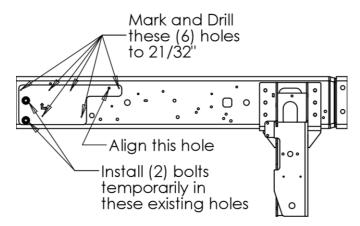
Passenger side template location for upper strut mount frame drilling – DS175F53
